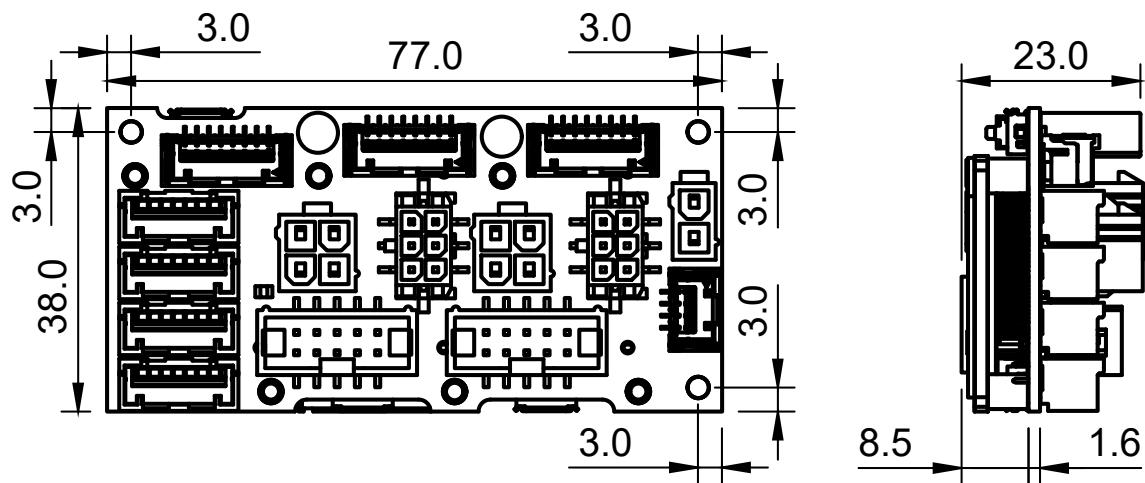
2-axis EPOS4 Micro Programmable Motherboard - Dimensional drawing [mm]
